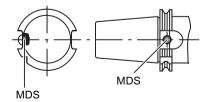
Installation example of MDS D421/D521/E623 in a steep cone
